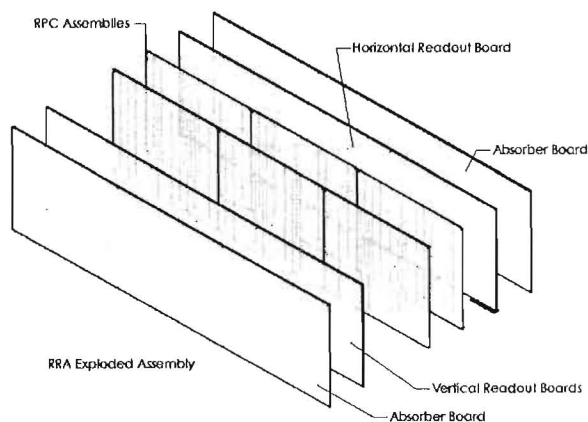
Components of an RPC/Readout Assembly (RRA).
